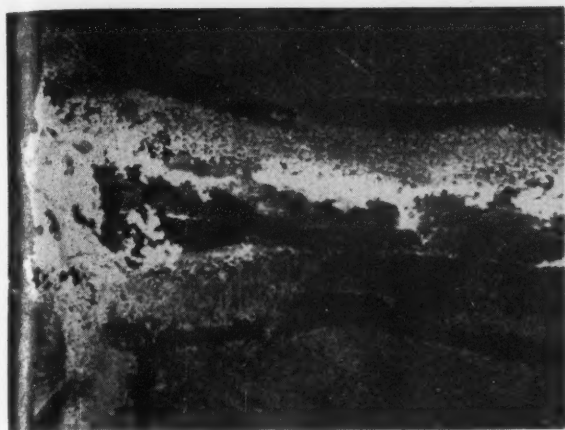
Localized corrosion adjacent to weld in a fabricated zirconium pipe section. Unetched, 3X.
